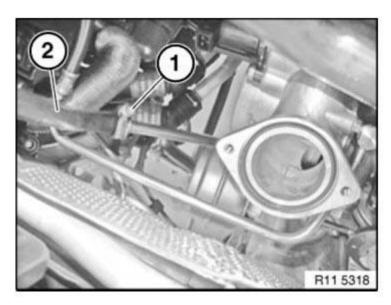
Identifying Coolant Line And Hose Clip Courtesy of BMW OF NORTH AMERICA, INC.
